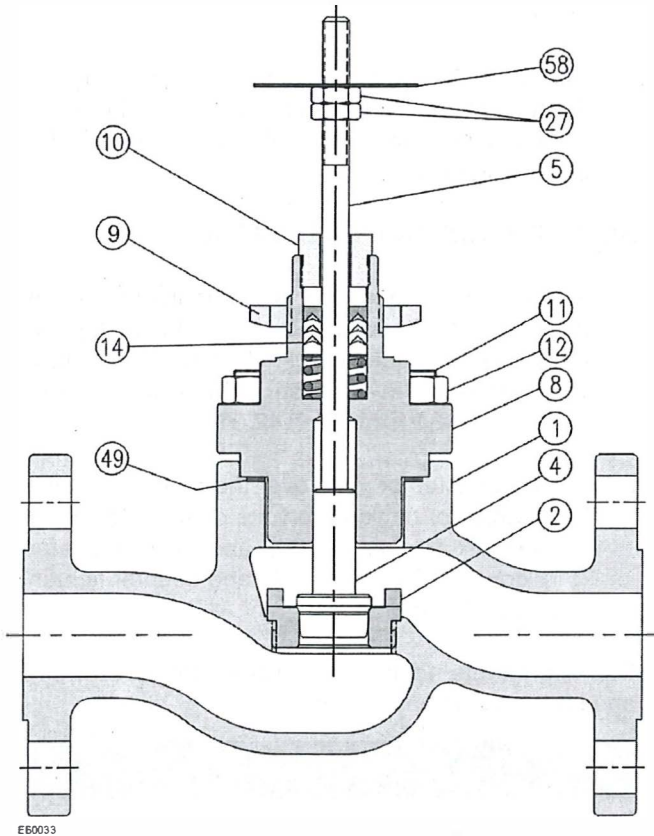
24000CVF Valve Body Assembly Shown with Standard PTFE Spring Loaded Packing
